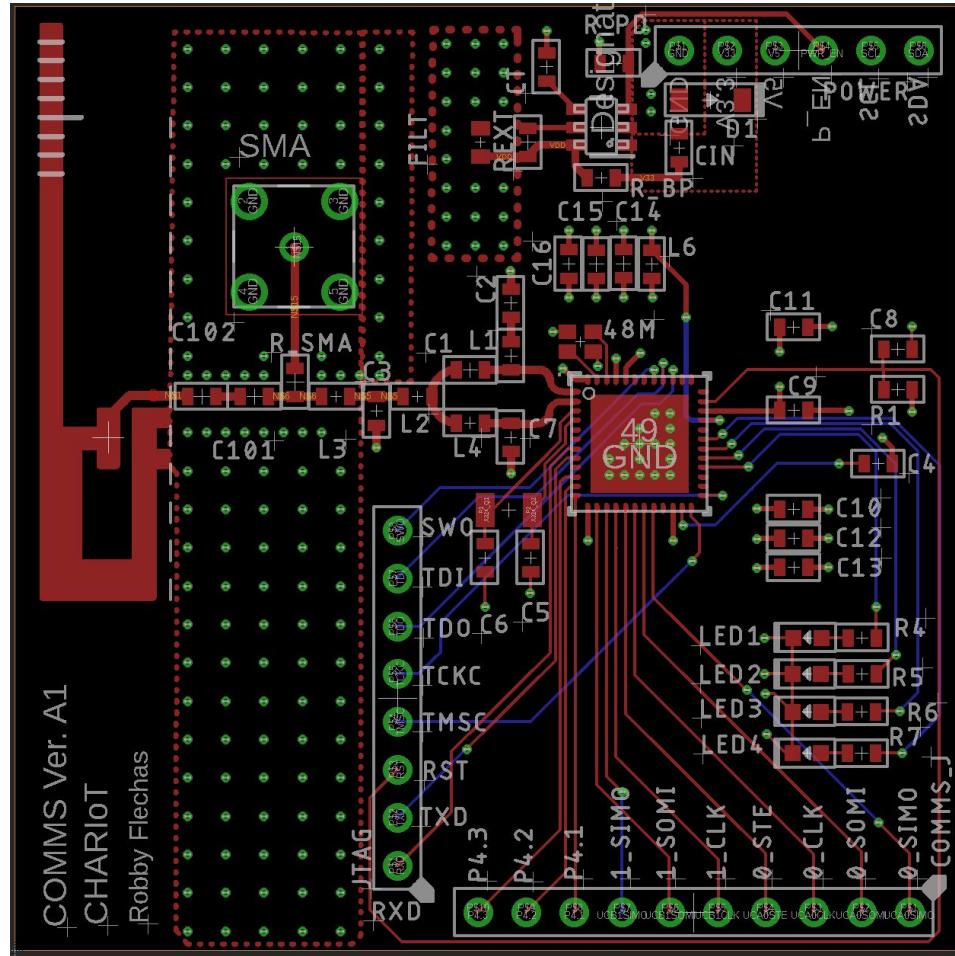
Prototype 2 Comms Board with Trace Antenna PCB
